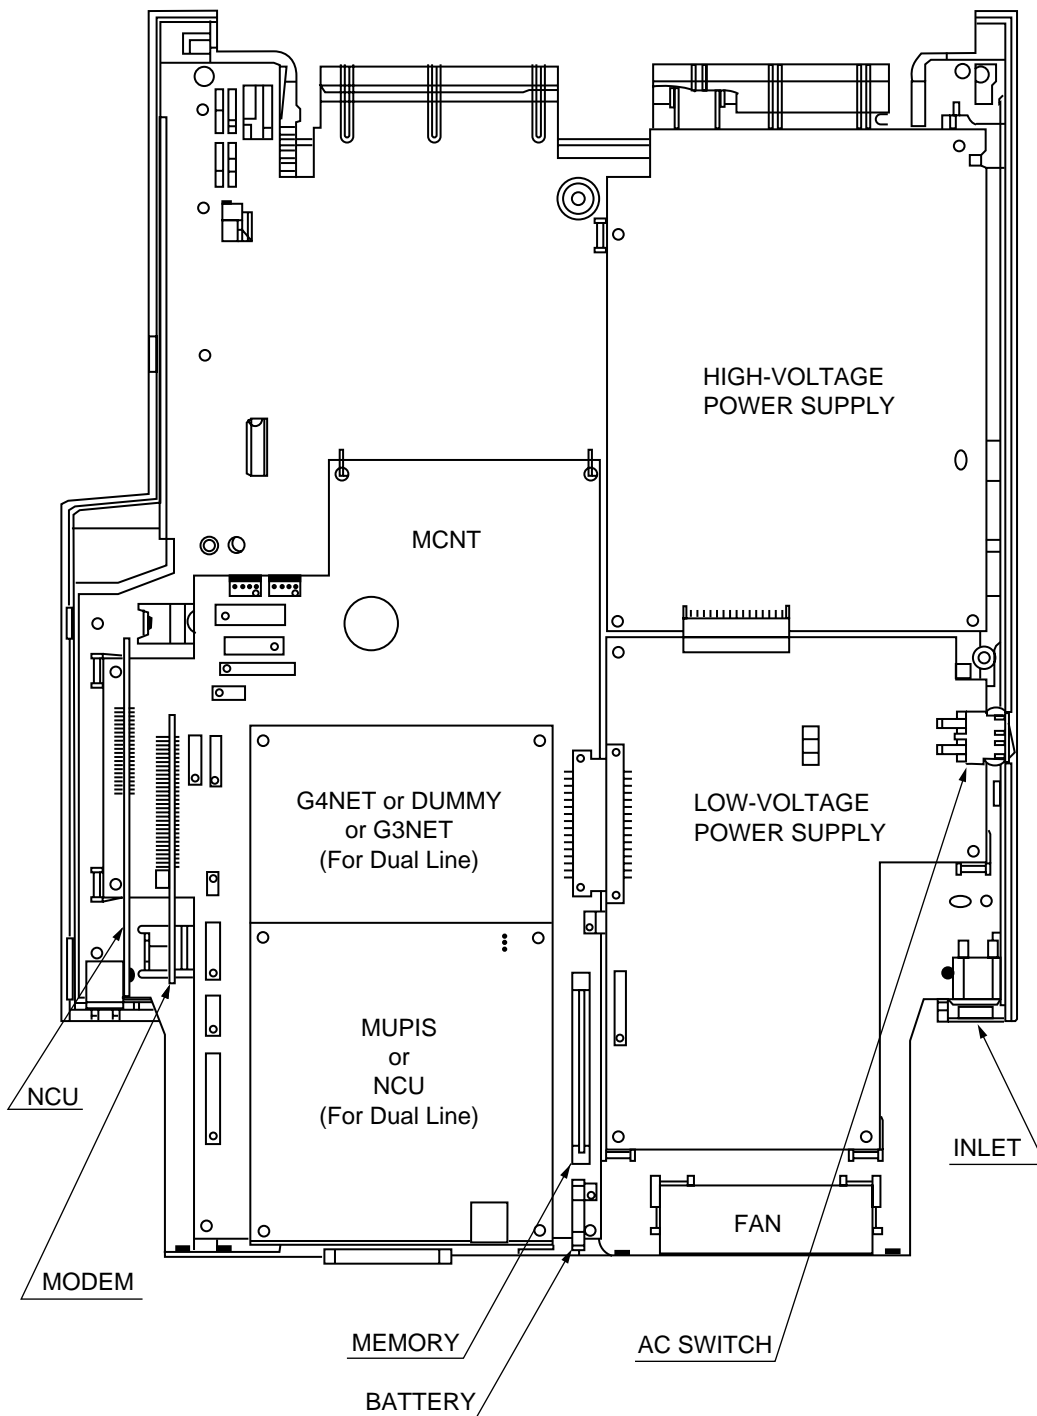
Overall Dimension and Mechanical Structure 2/2
